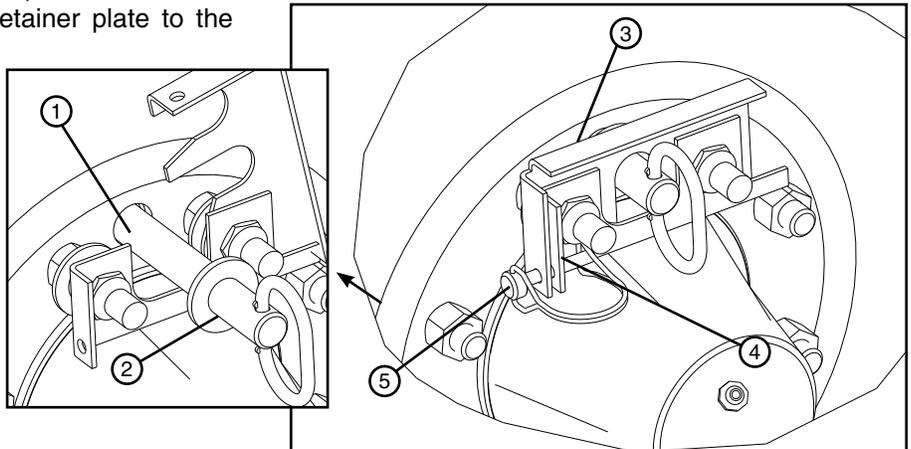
1. Hub Torque Pin Receiver 4. Retainer Clip
